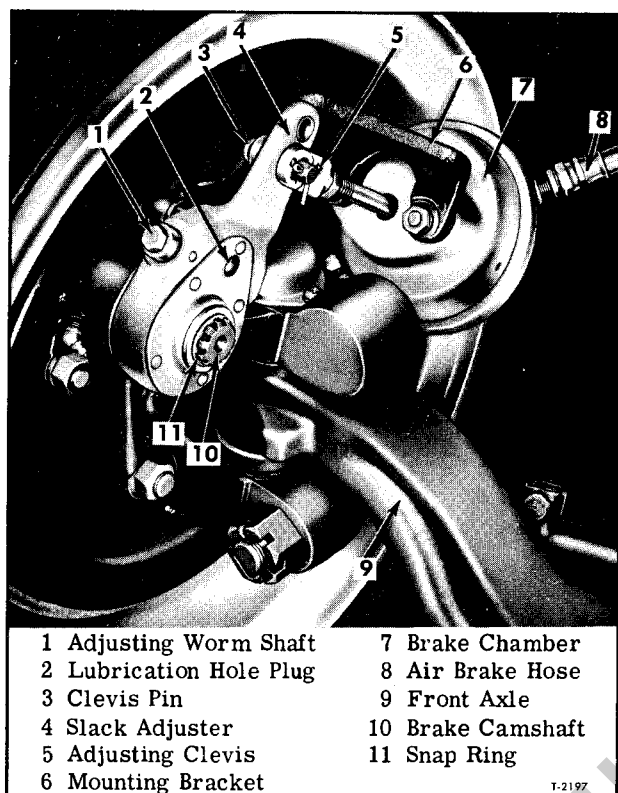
Brake Chamber and Slack Adjuster Installed (Front)
